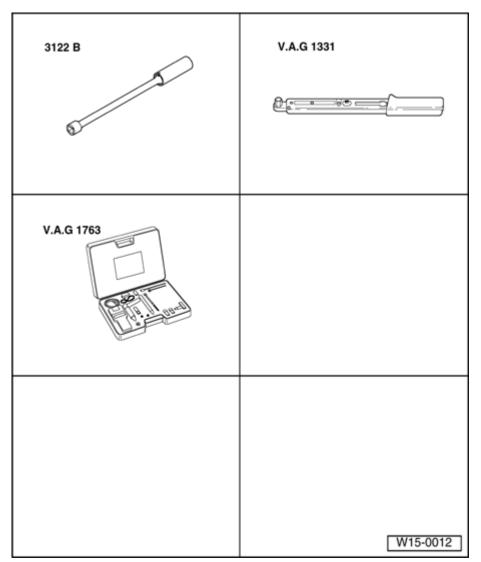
Identifying Special Tools - Compression Pressure, Checking
